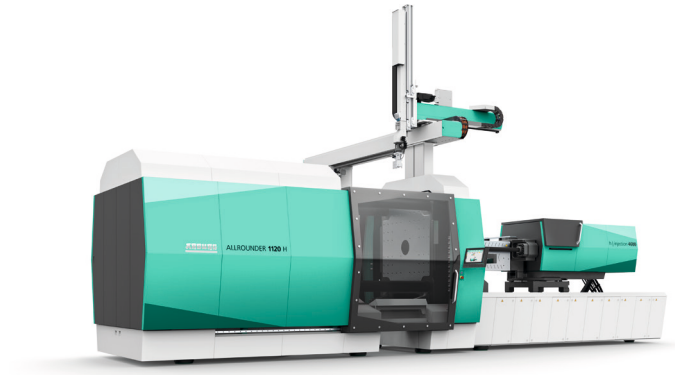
Injection molding machine (image: Arburg GmbH + Co. KG)
